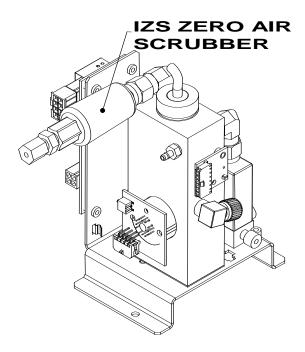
IZS O₃ Generator Zero Air Scrubber Location
